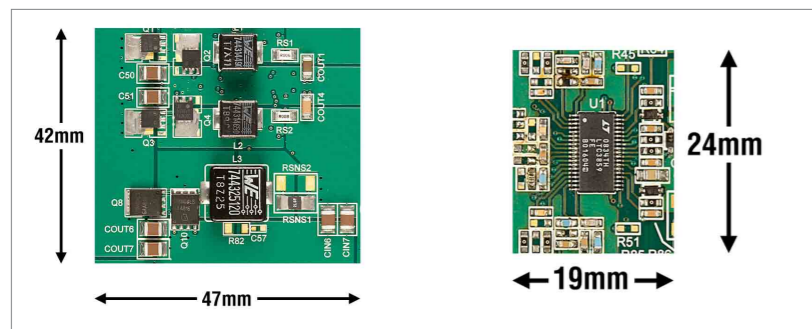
Size & Layout of LTC3859A Demo Board (a) Top and (b) Bottom sides
